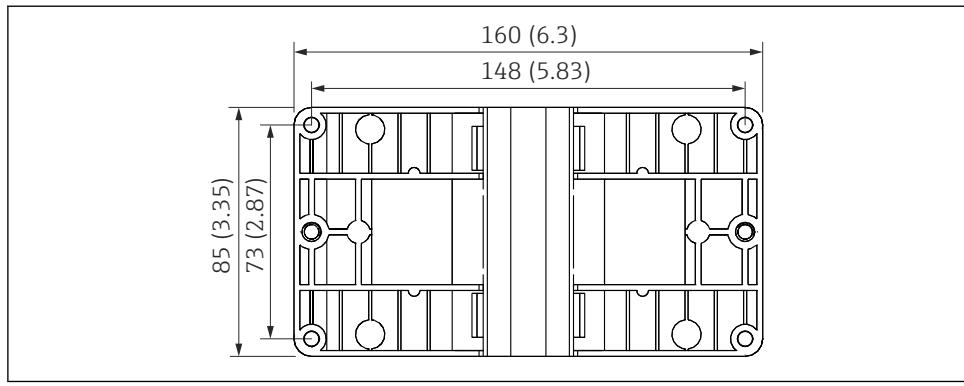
Dimensions of the mounting plate for wall, pipe and panel mounting in mm (in)
